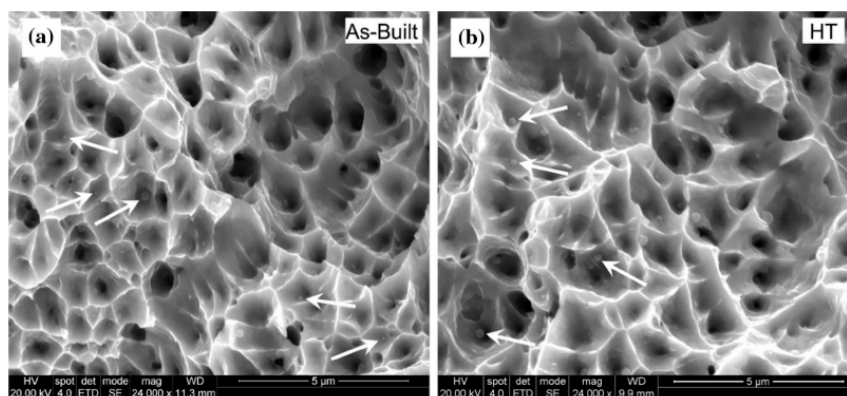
Fracture surfaces of AISI 316L stainless steel: (a) as-built and (b) heat-treated. Arrows mark a few of the many examples of fine particles observed resting inside ductile dimples throughout the fracture surface [90].
